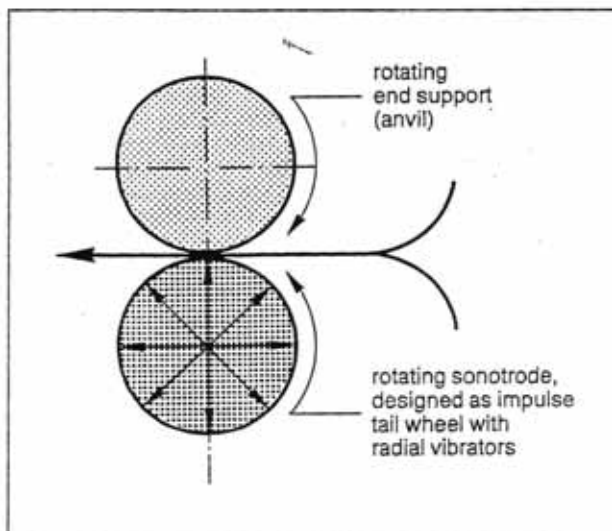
Ultrasonic seam welding, continuously powered by the sonotrode.
